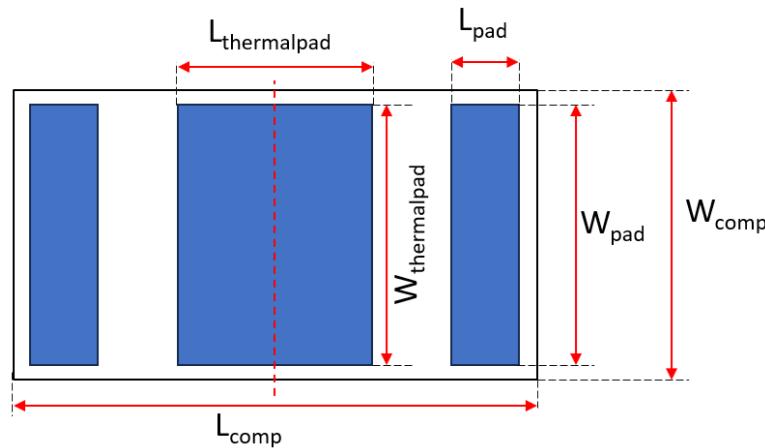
Default Footprint Geometry. The image is built with input from [34].
